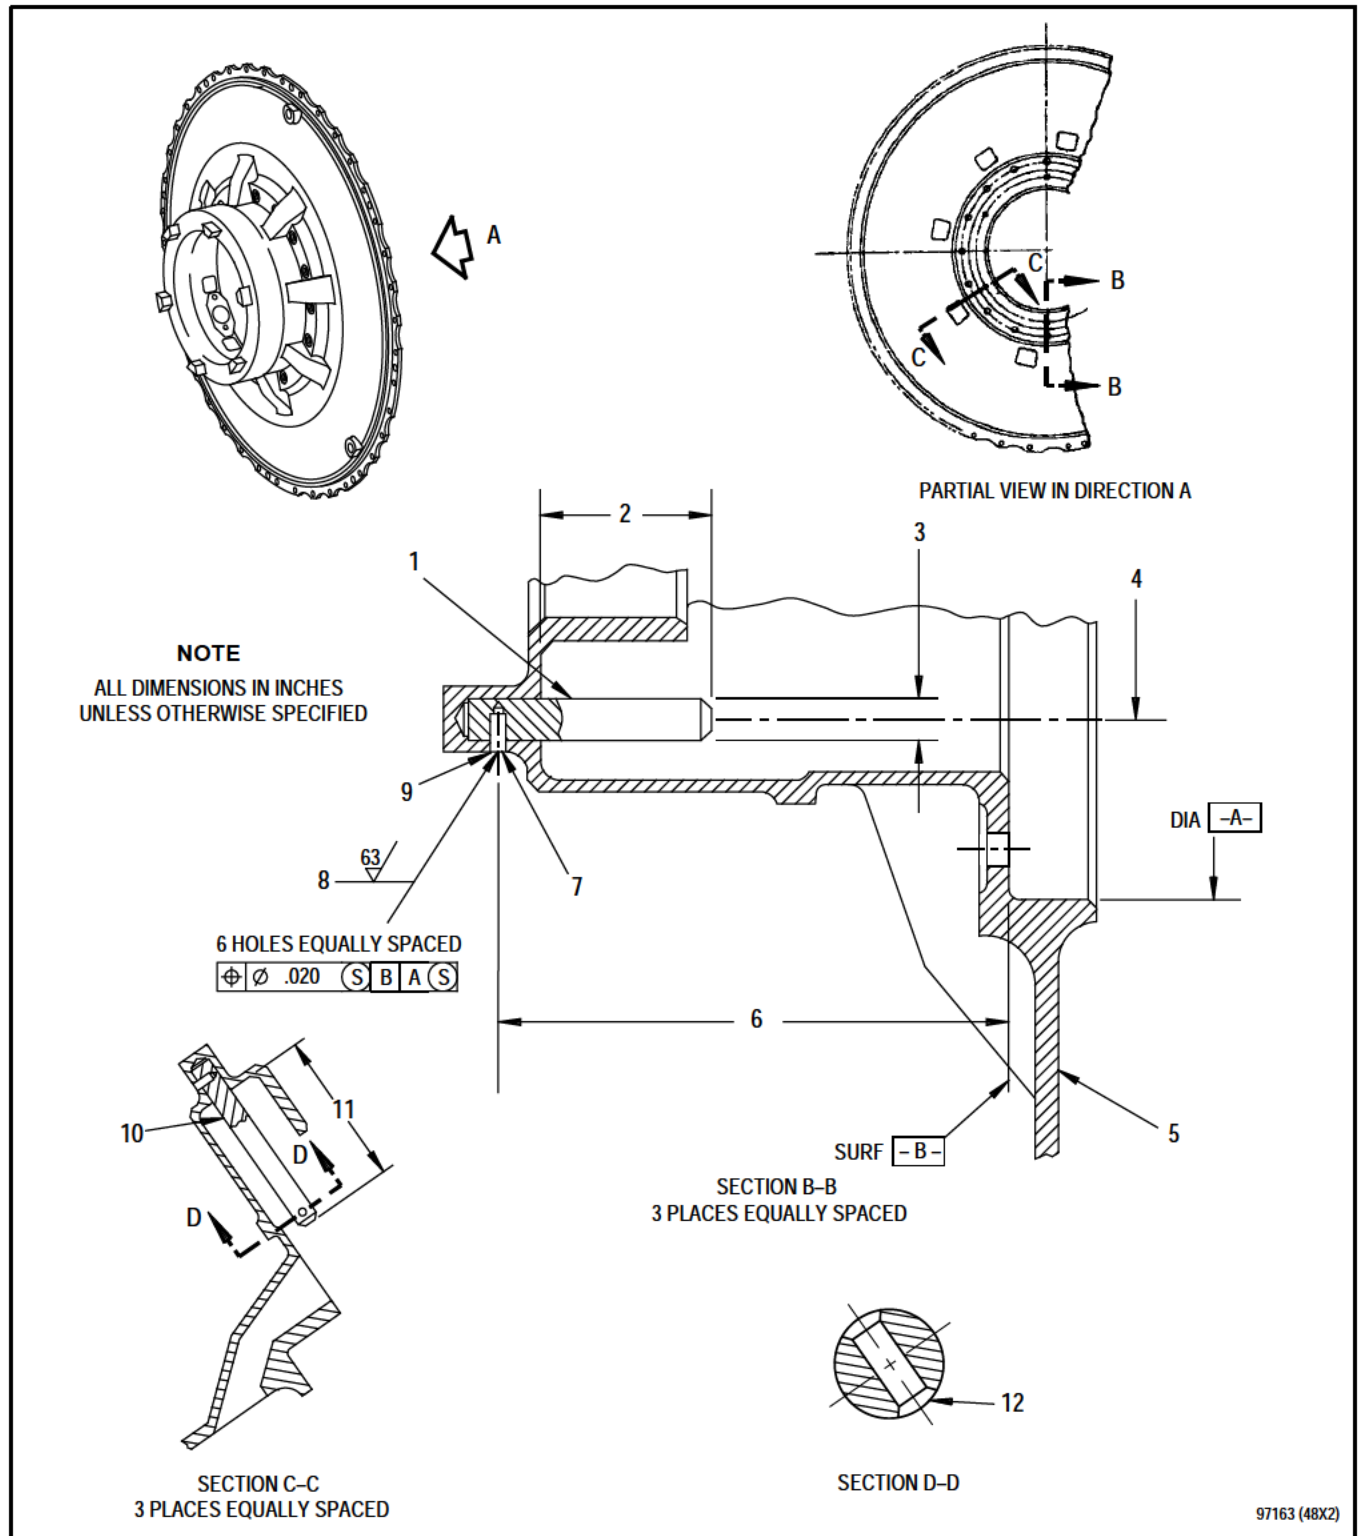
No. 2 Bearing Support Assembly - Headless Straight Pin Replacement
